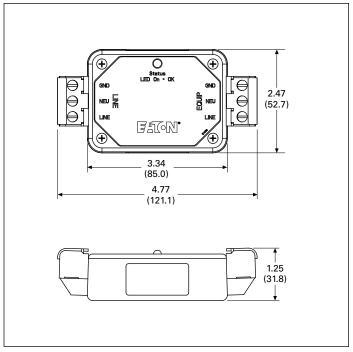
AGCF12010-CP Dimensions in Inches (mm)
